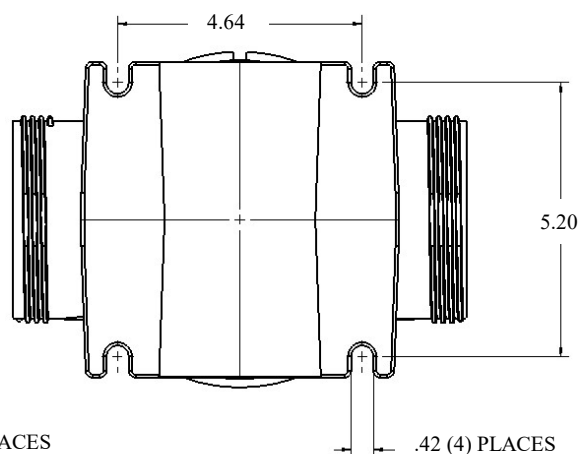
SB-Series base mounting pad (bottom view) – 1-1/4" thru 2".
